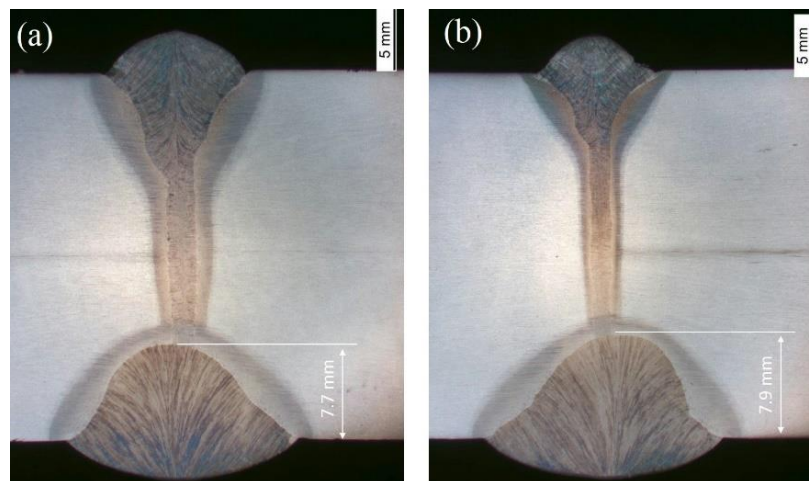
Cross-sections of partial penetration HLAW seams with SAW as opposite layers: (a) HLAW layer performed with $v_w = 0.6$ m/min; (b) HLAW layer performed with $v_w = 1.15$ m/min.
